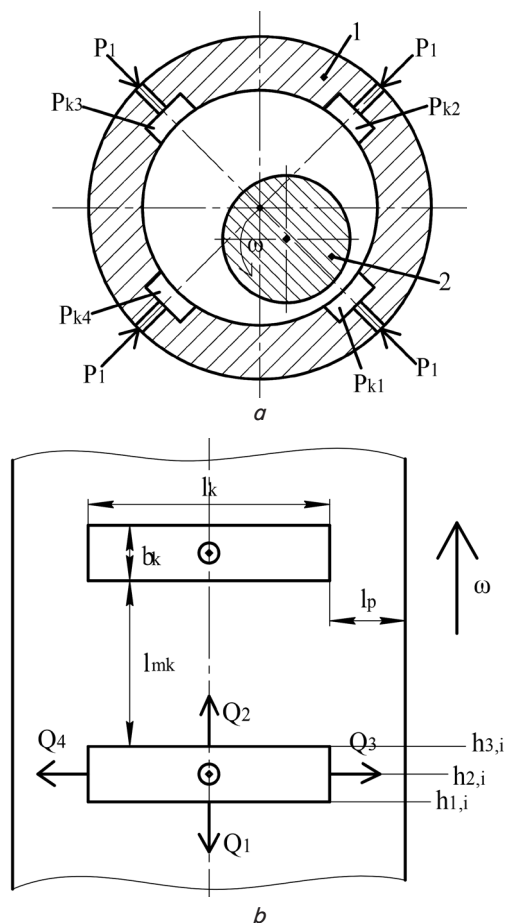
Diagram of a wooden hydrostatic bearing: *a* – general view of the bearing; *b* – working surface with rectangular bearing chambers
